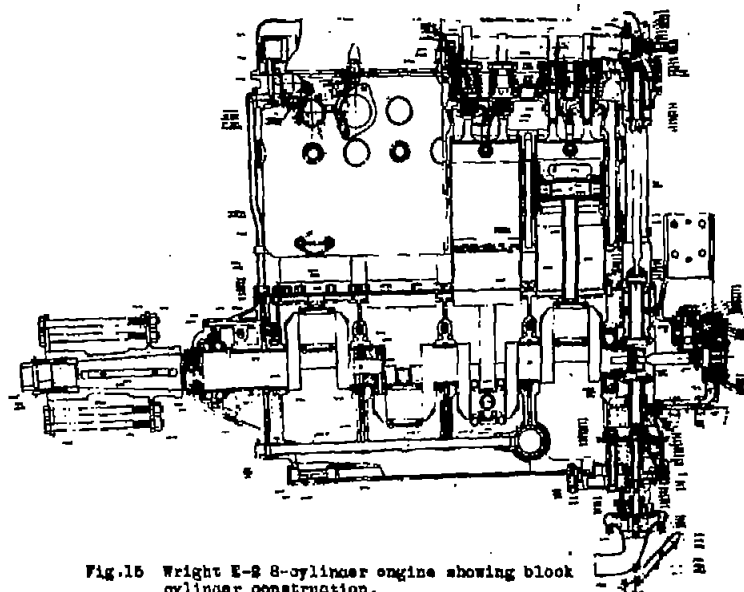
Wright E-2 8-cylinder engine showing block cylinder construction.
